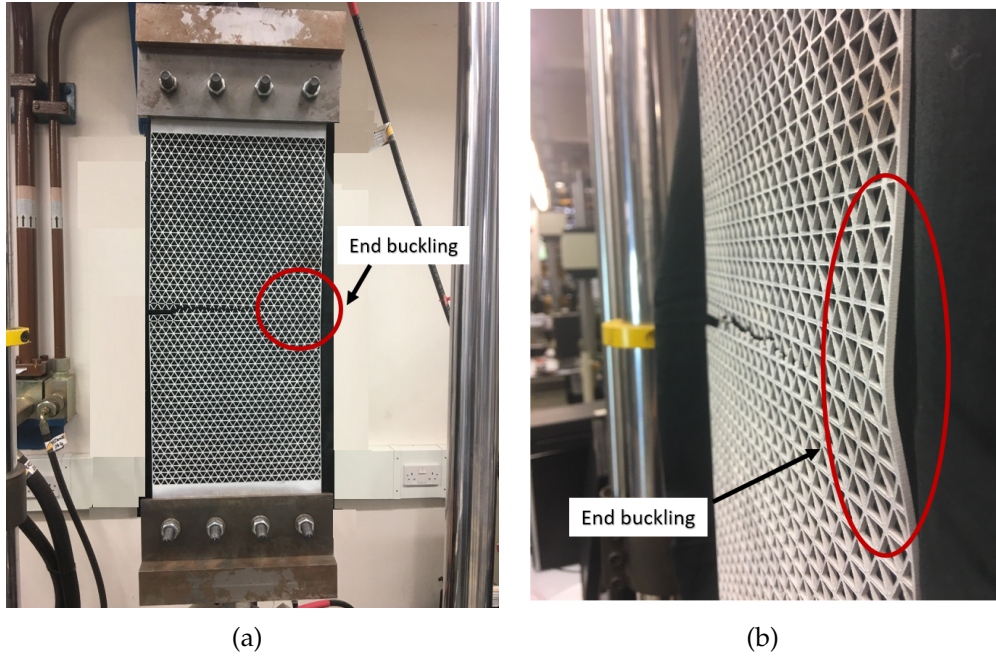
Out-of-plane deformation for a  $30^\circ$  fracture specimen
